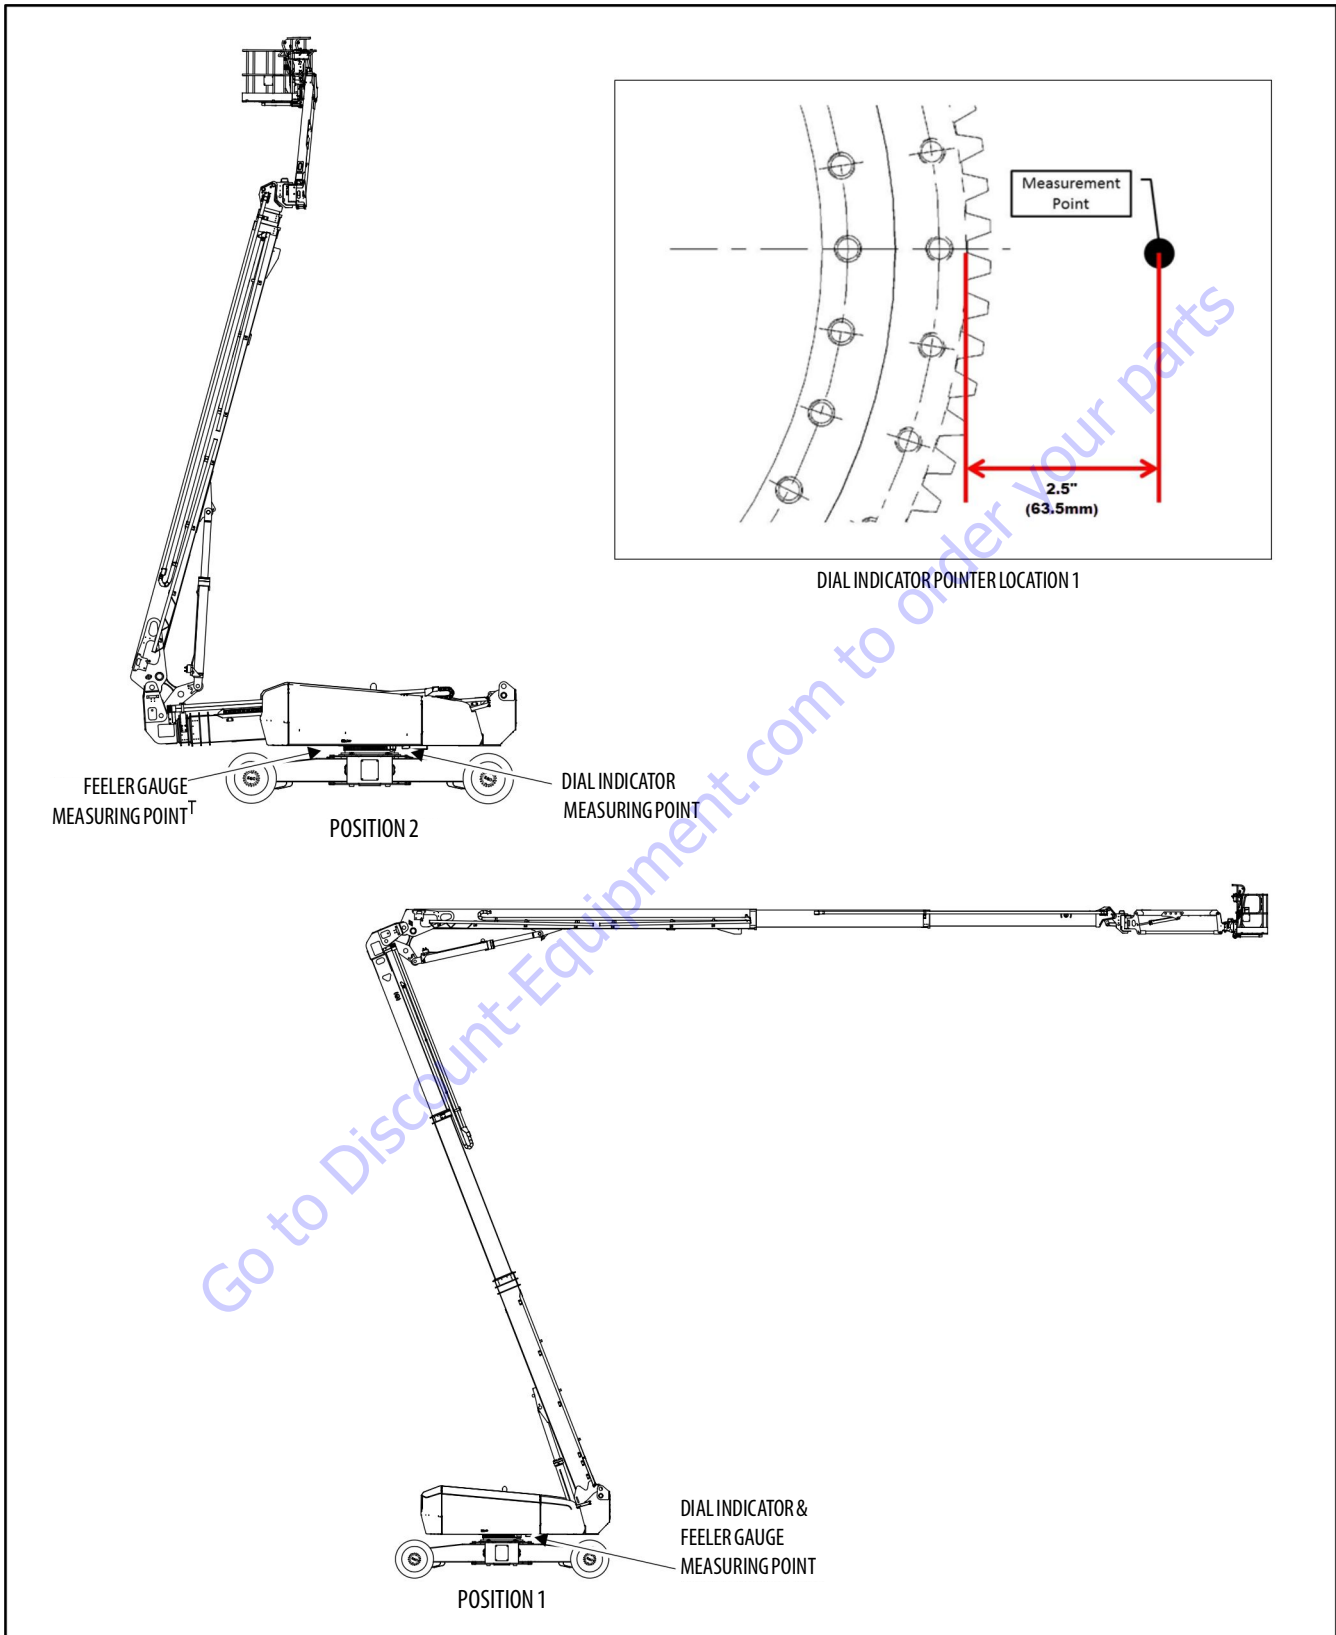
Swing Bearing Wear Tolerance
